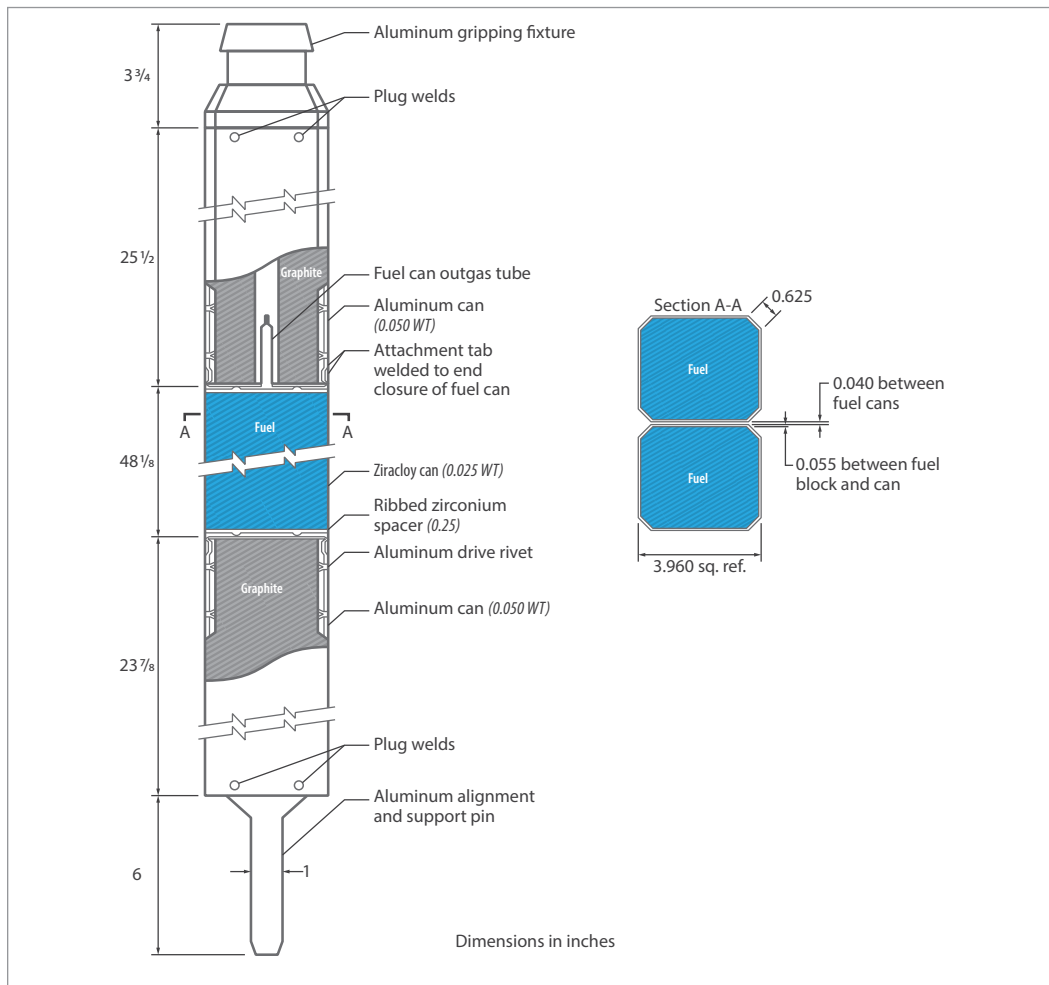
Standard zircaloy-clad TREAT fuel assembly.
